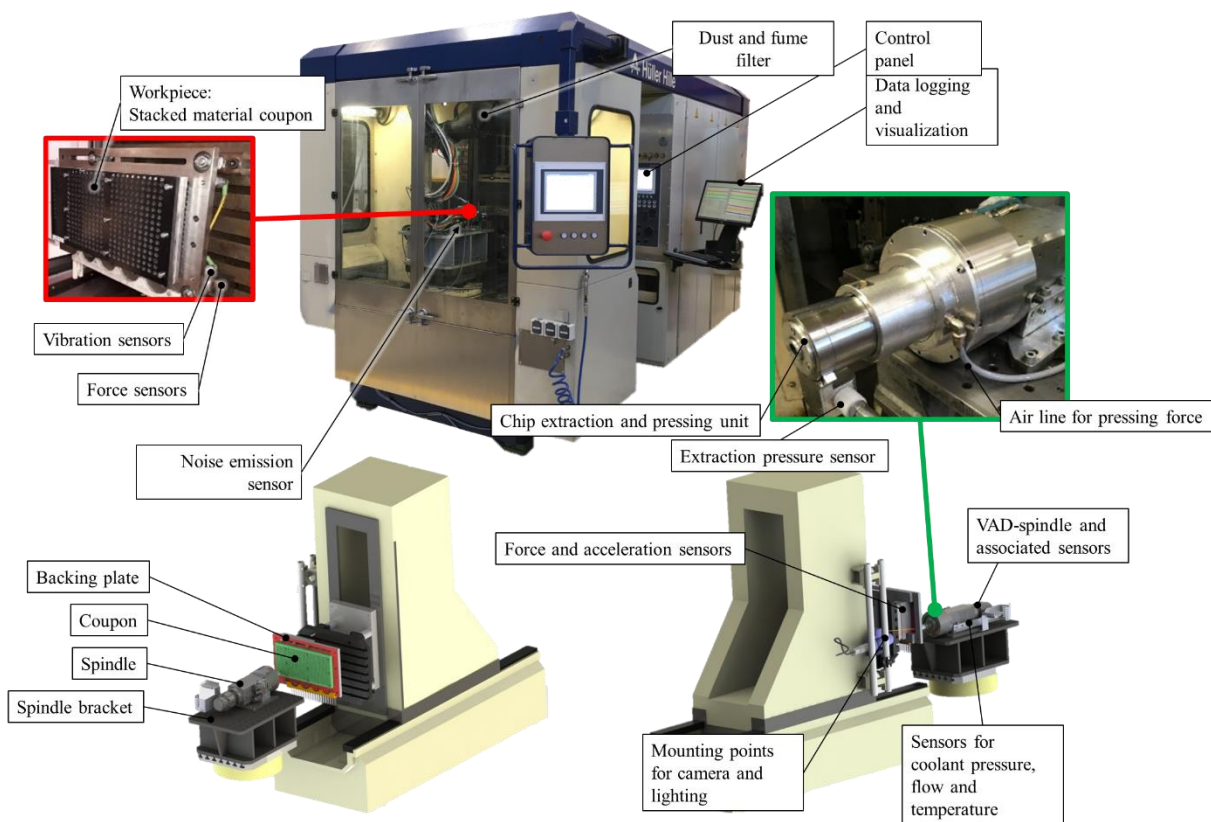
Experimental setup on Hüller Hille nb-h90 machining centre
